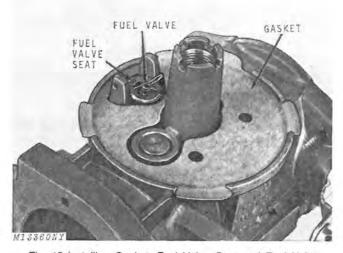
Installing Gasket, Fuel Valve Seat and Fuel Valve
